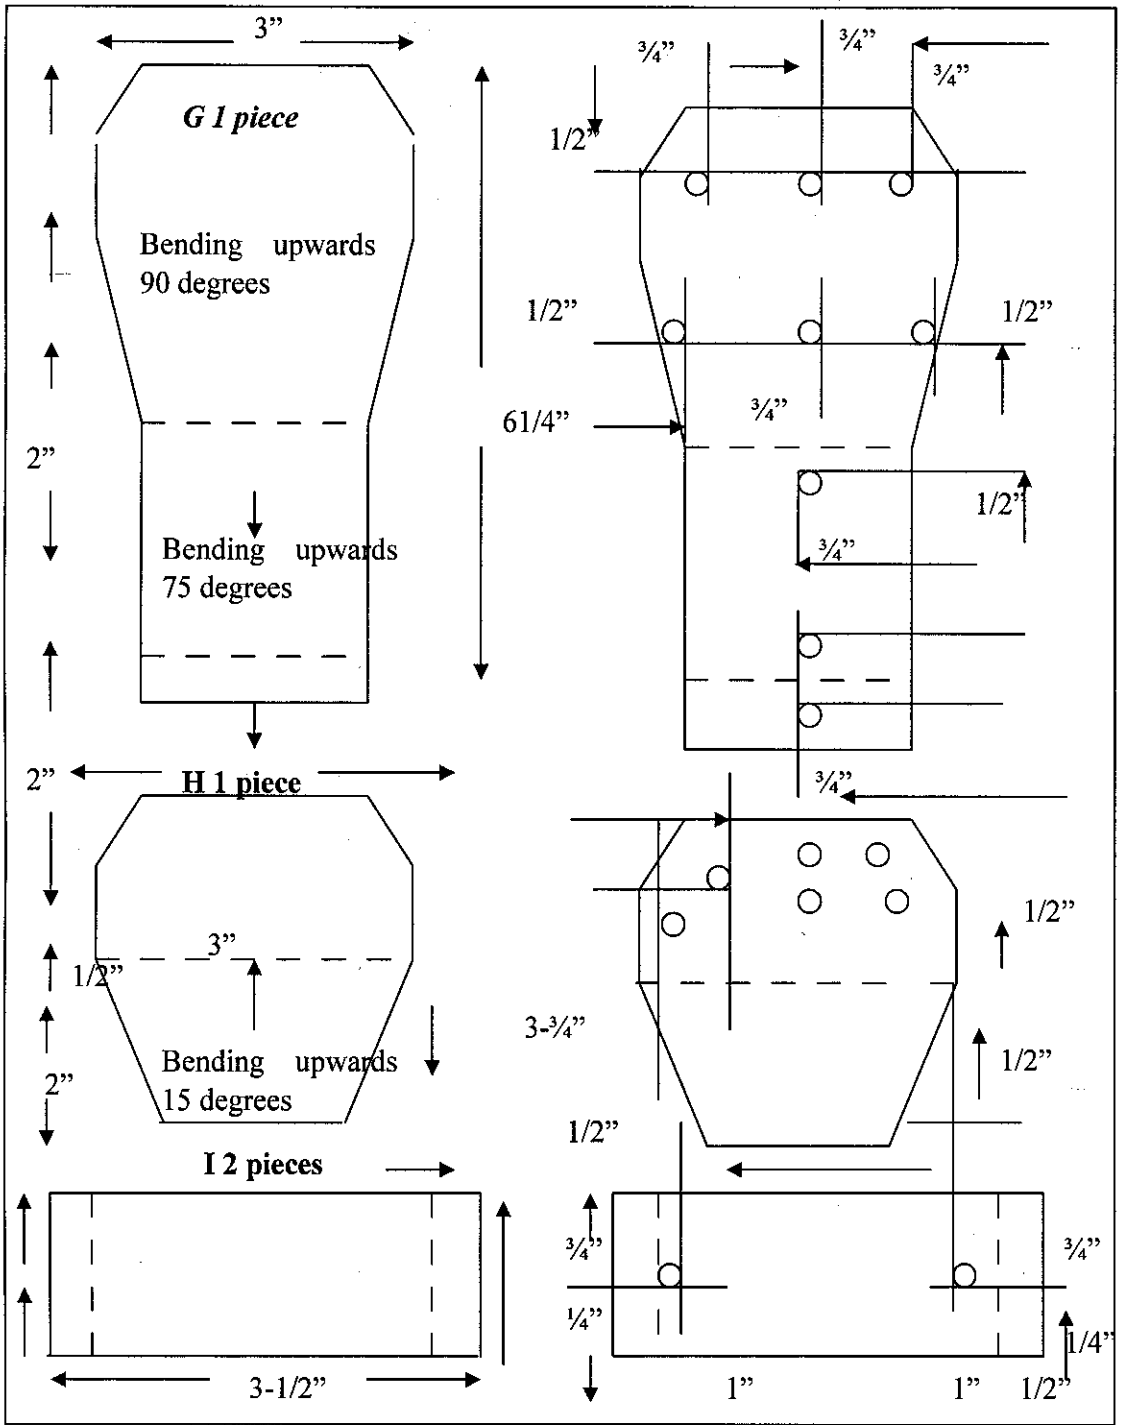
Cutting, bending, and drilling diagram for bottom head piece G, top head piece H, and head support pieces labeled I
